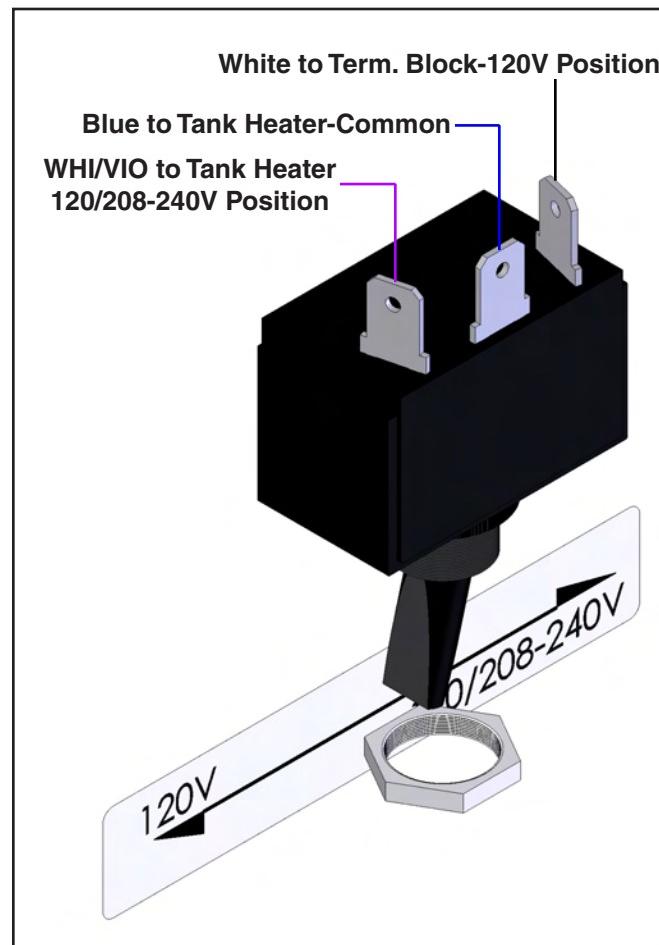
VOLTAGE SELECTOR SWITCH TERMINALS
